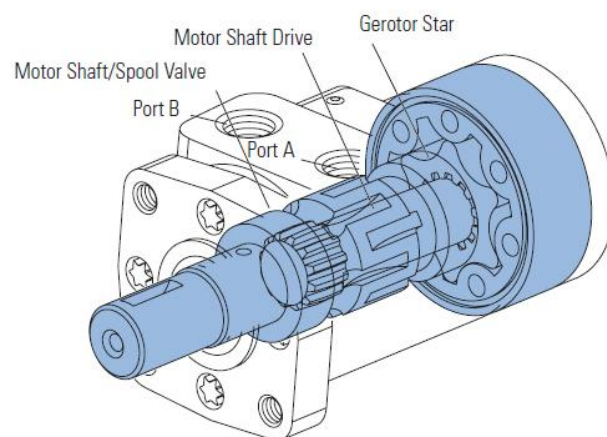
Typical gerotor pump/motor construction [7]. Permission pending.
